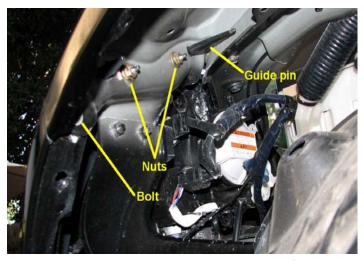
Two nuts and one bolt secure bumper cover to fender.
